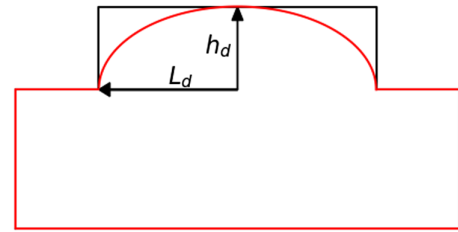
Sketch showing the geometry of small welding defects on the surface of the vacuum chambers. The black line shows a pessimistic geometry to be modeled, whereas the rounded shape is more realistic.
